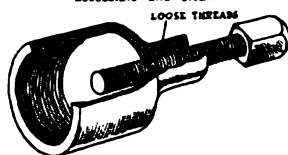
The feature of this rear wheel pulser is that the screw is hardened tool steel, loosely threaded into the cap. The endplay permits a sharp blow on the screw to loosen the sticking wheel.
